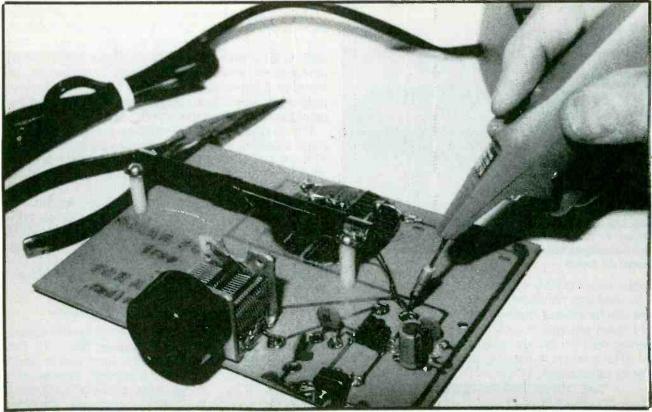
The cordless soldering iron is ideal for soldering solid-state devices.
